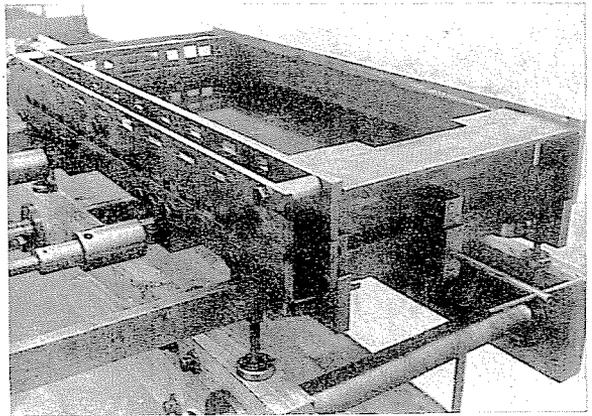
The empty mould is seen here from the butt end toward the cross-combs.
